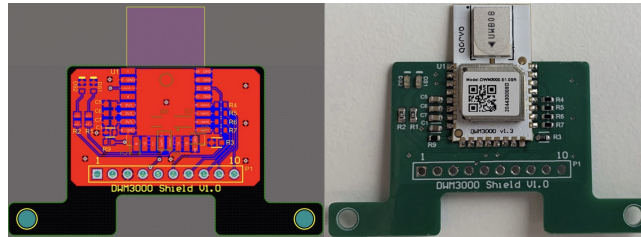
This work's PCB design on Altium Designer (left) and realized as a board assembled with the components (right). The board is double sided, with through-hole plating, green solder mask and a white silkscreen.
